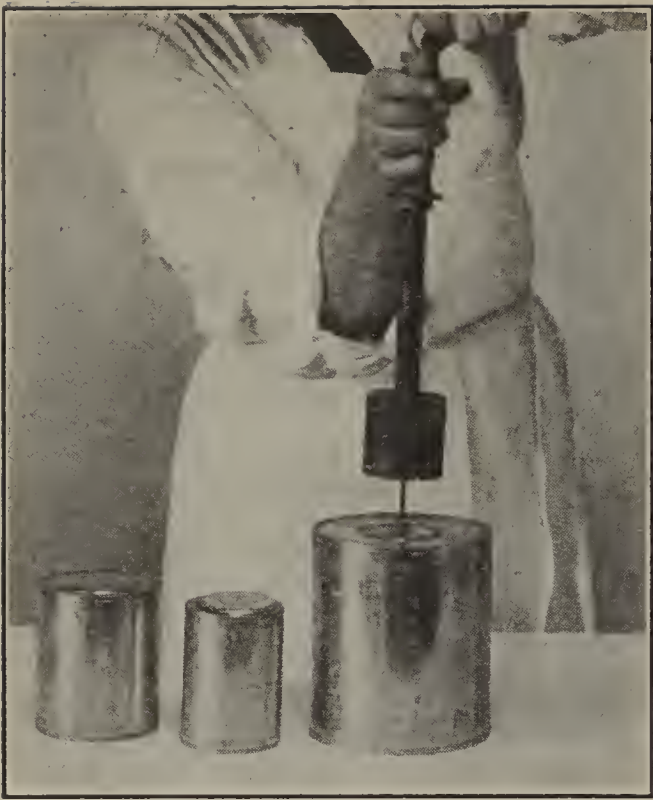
Position of capping iron and upright steel before lowering and sealing the rim.
